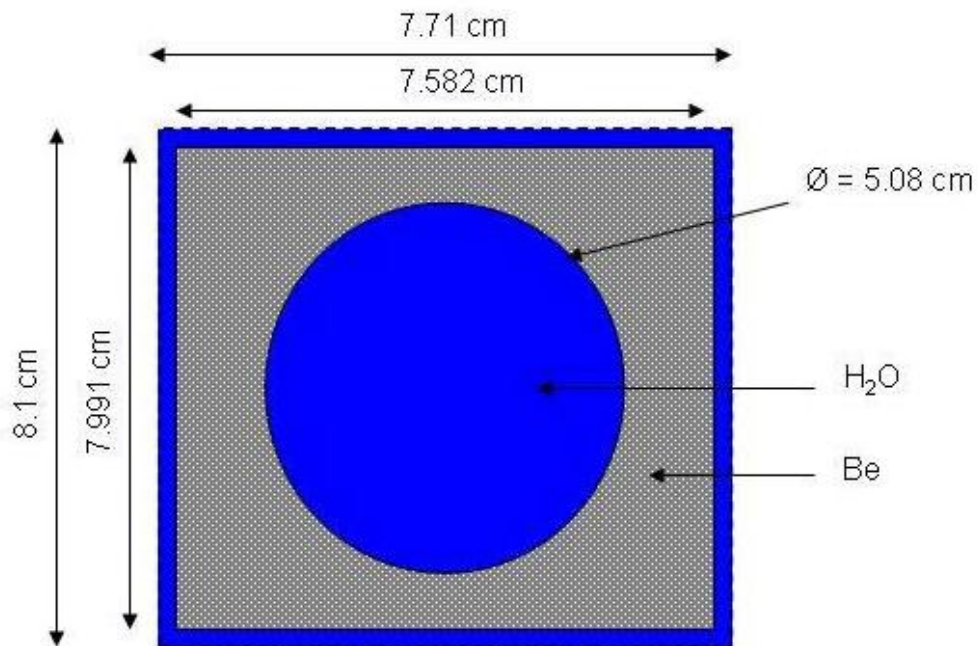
Radial View of the Hollow Beryllium Type Reflector Assembly. [1]
